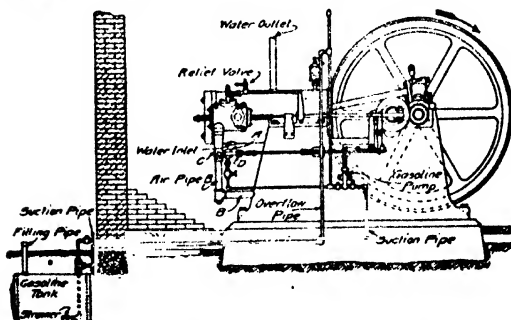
Arrangement of Fuel Tank and Connections, Charter Gasoline Engine
